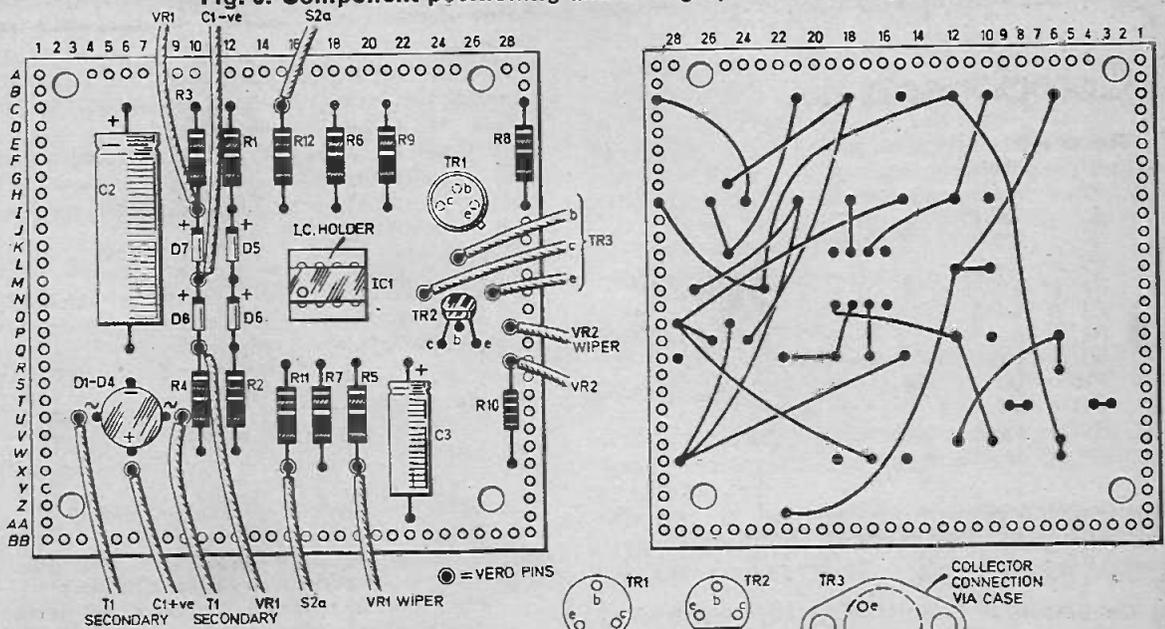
The layout of the components on the top side of the board, and interconnections on underside.
